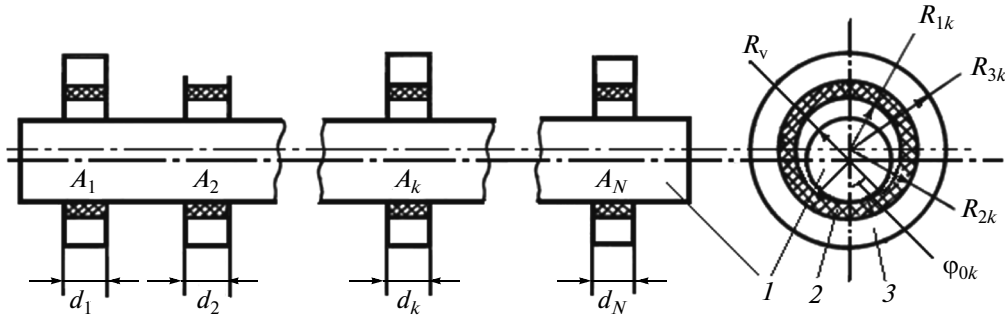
Scheme of the bearing system on the common shaft. (1) Shaft, (2) bush, and (3) holder.
